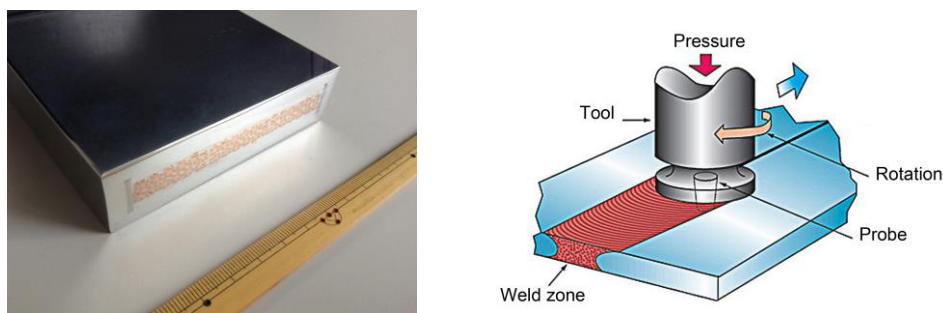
Photograph of the prototype indirectly cooled superconductor (left) and conceptual scheme of friction stir welding (FSW) (right).
